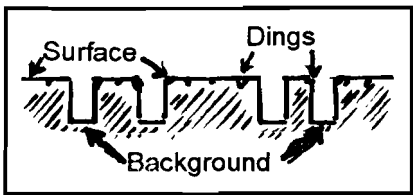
Cutaway view of surface of knob showing design with dings in it.
